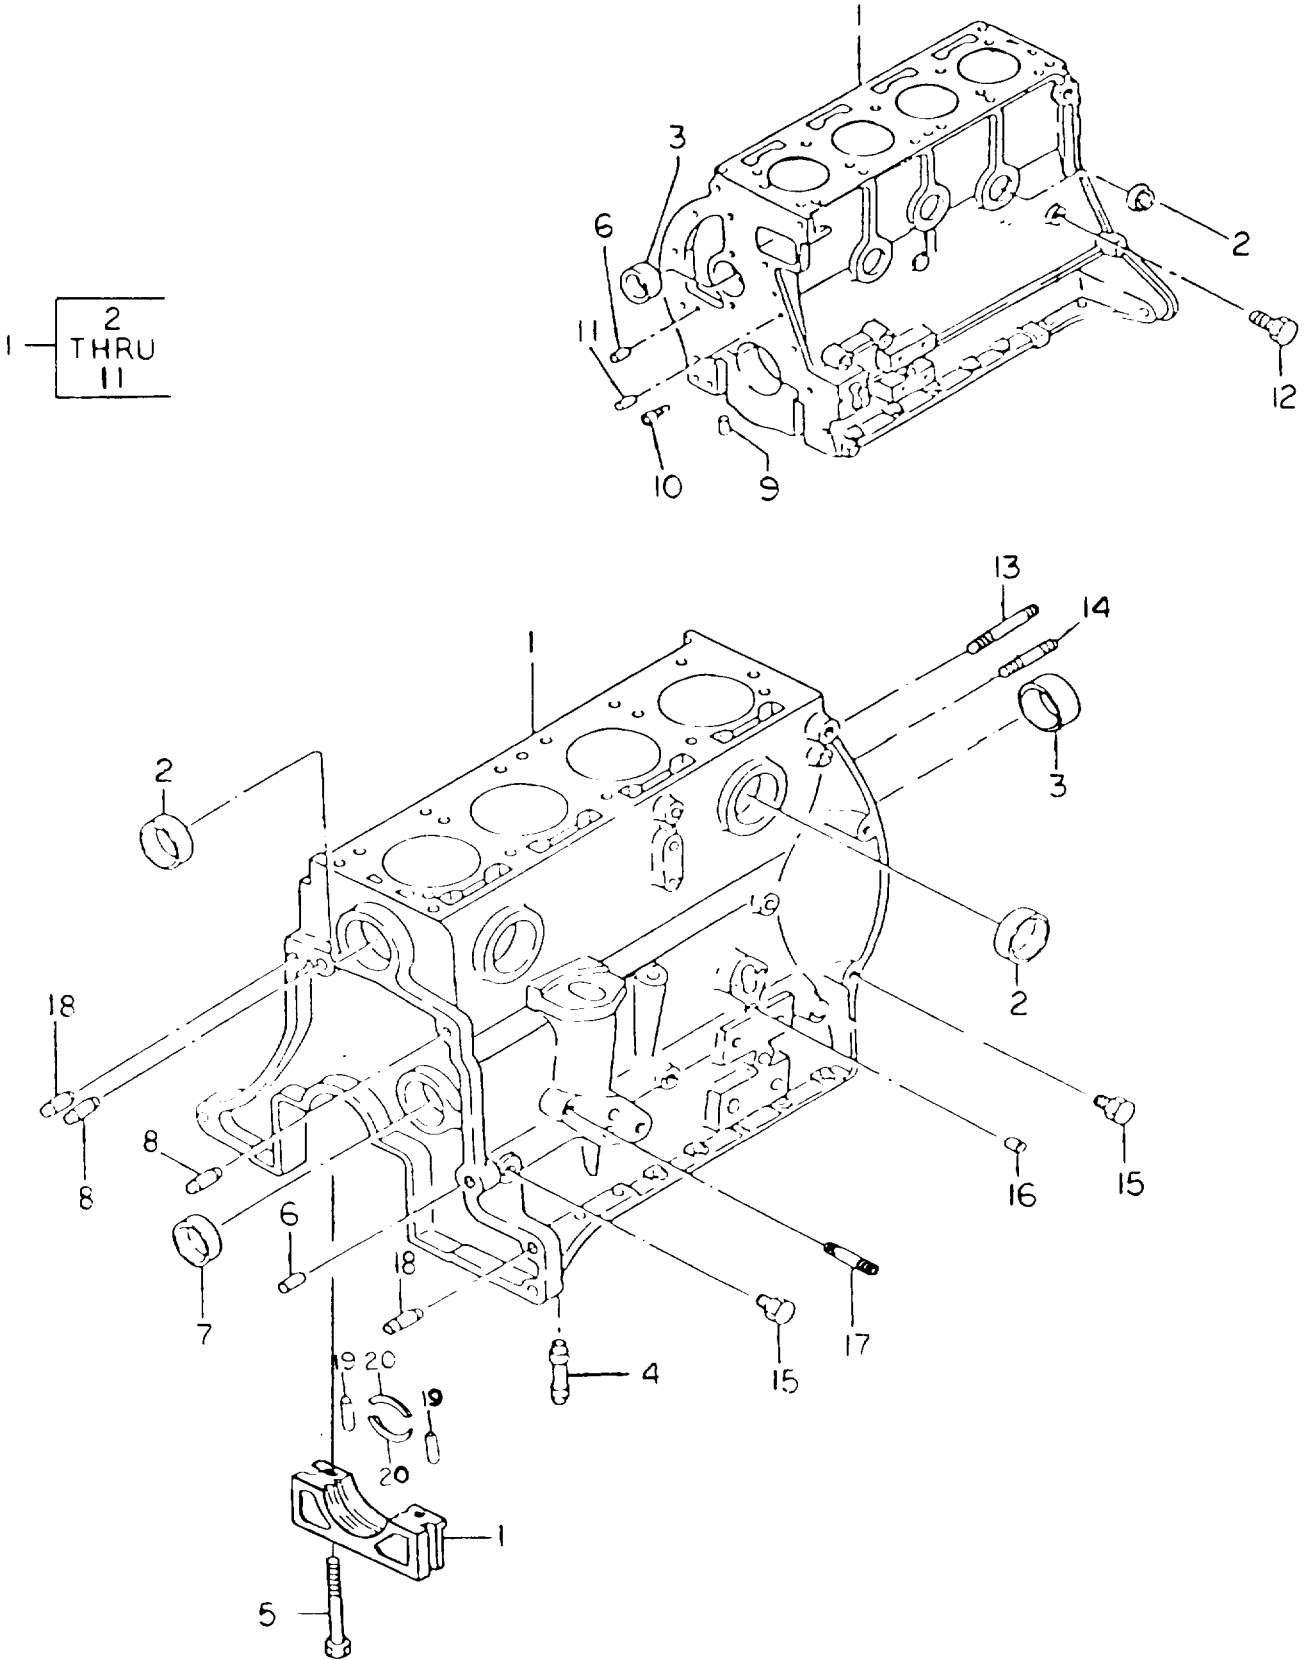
ENGINE ASSEMBLY, MOUNTING
